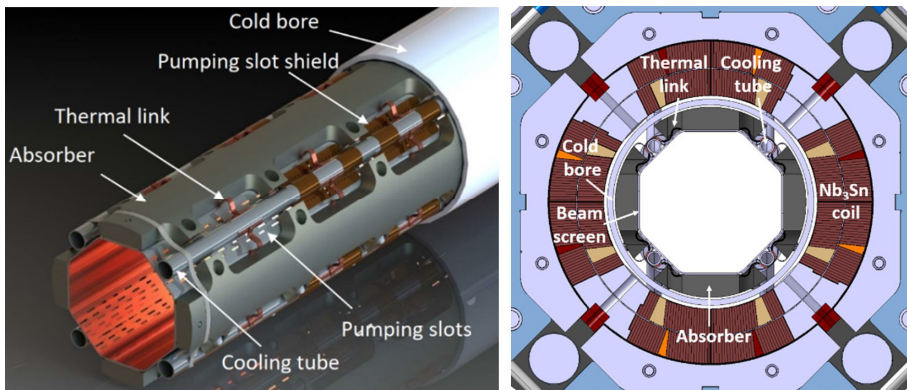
Left, the Q1 shielded beam screen inserted in its cold bore tube (for illustration, one electron shield has been removed to show the slots behind); Right, cross-section of the Q1 cold mass.
